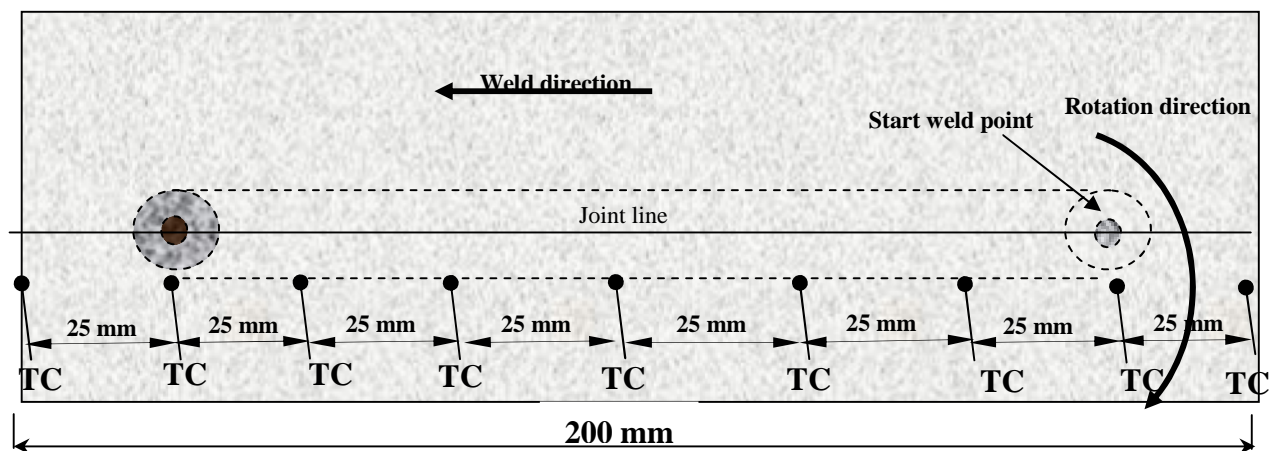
Layout of the thermocouples on the workpiece surface.
